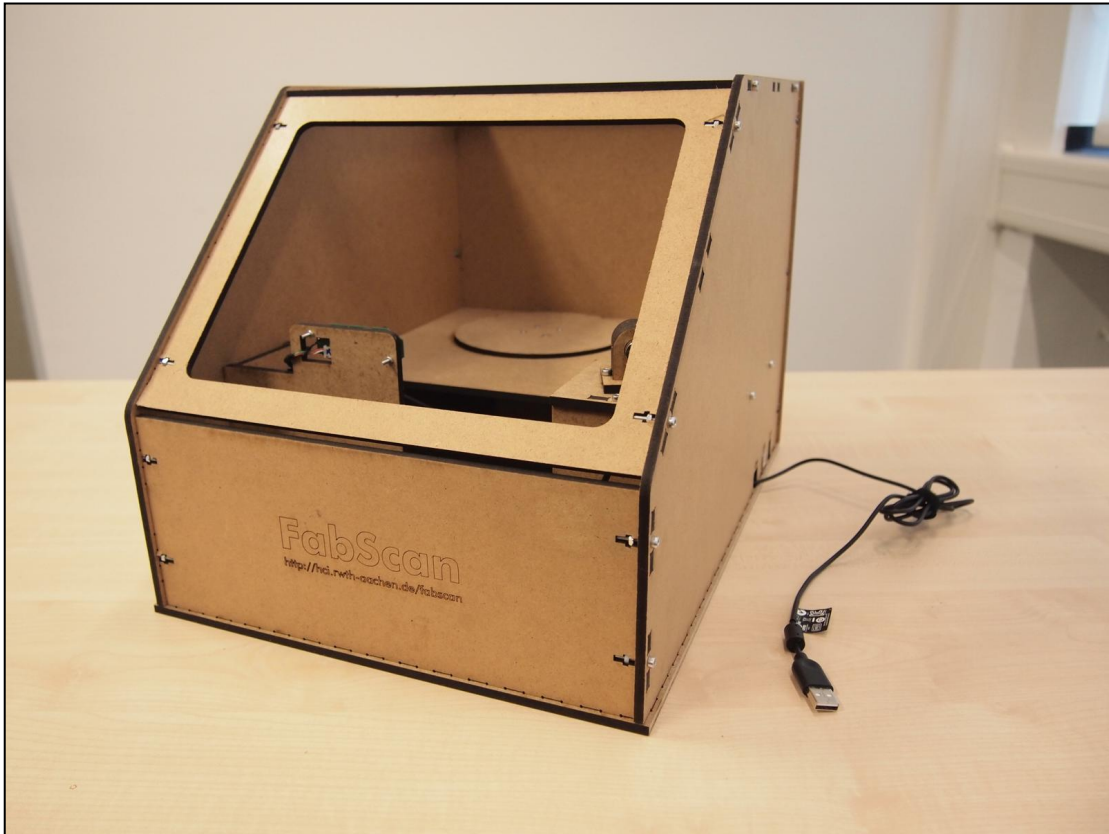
Place the 'Housing' assembly group to the Box bottom.
